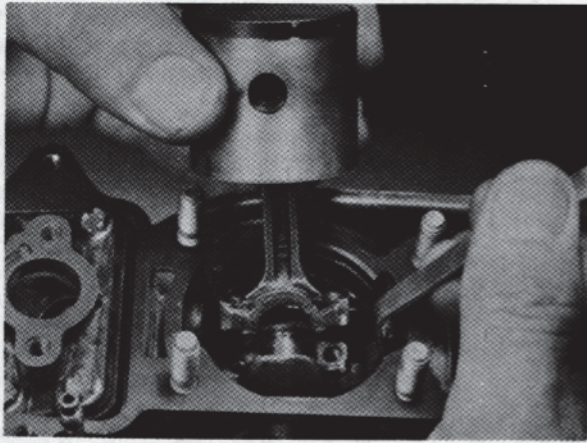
Installing piston and connecting rod assembly using locally made tool to hold rod cap in position. Tool can be made from flat strip of metal. Using grease, stick 14 rollers in cap and 14 rollers in rod; make sure that match marks on rod and cap are aligned.
